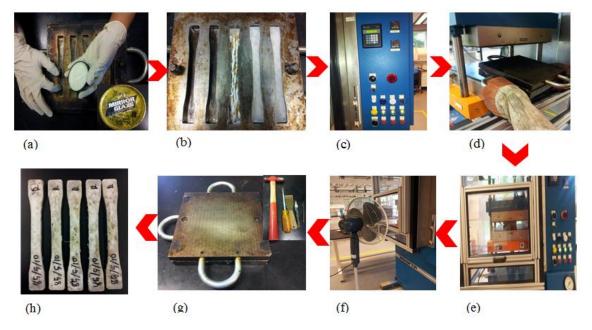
Fabrication process (a) mould greasing, (b) mould filling, (c) parameter setup, (d) mould preheating, (e) heating under compression, (f) cooling under compression, (g) mould detaching, (h) finished product.
